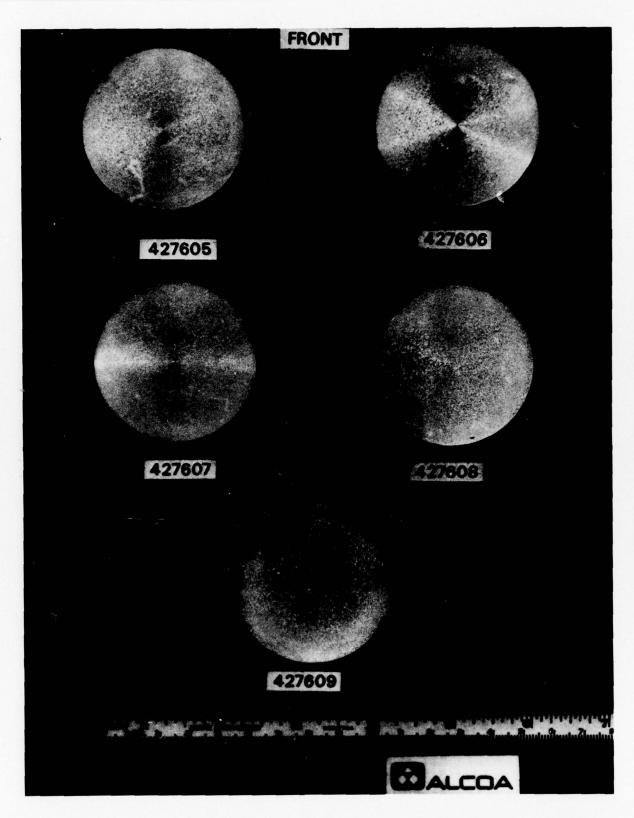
Etched Slices Removed from Front of Phase II Al-Mg-Li Extrusions (S. Nos. 427605 through 427609).
